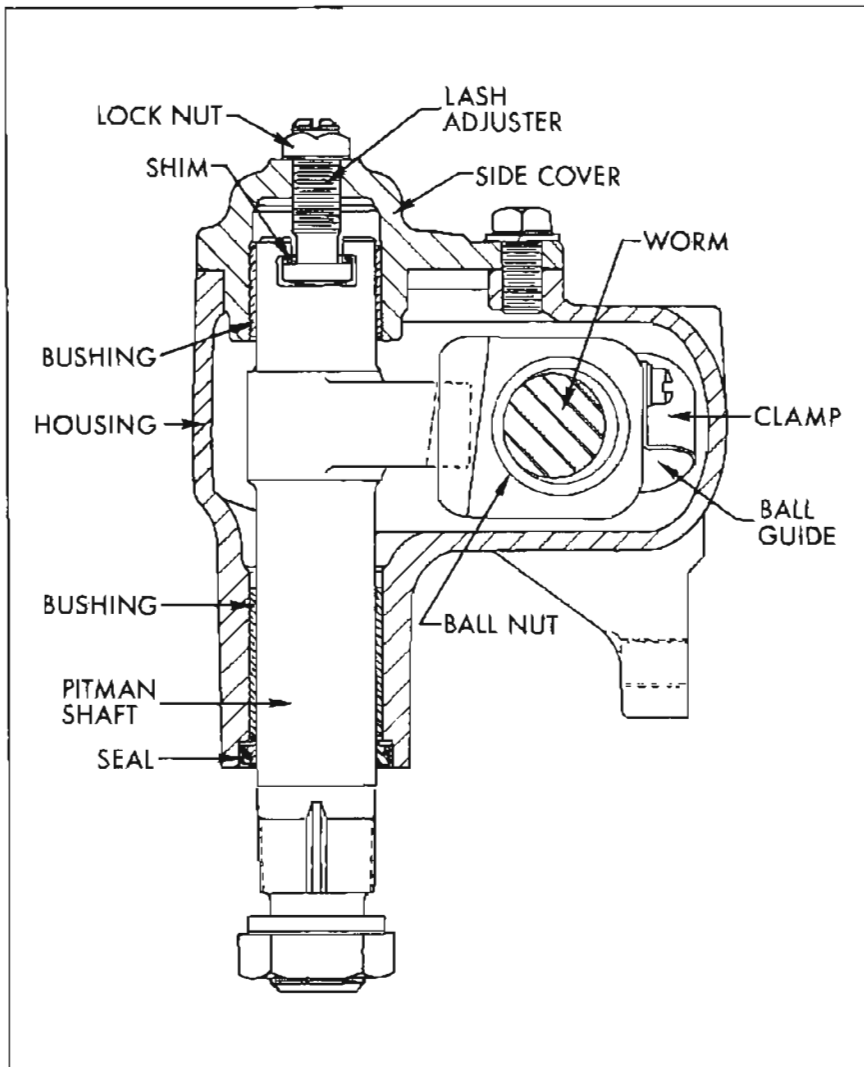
Steering Gear Pitman Shaft and Ball Nut
